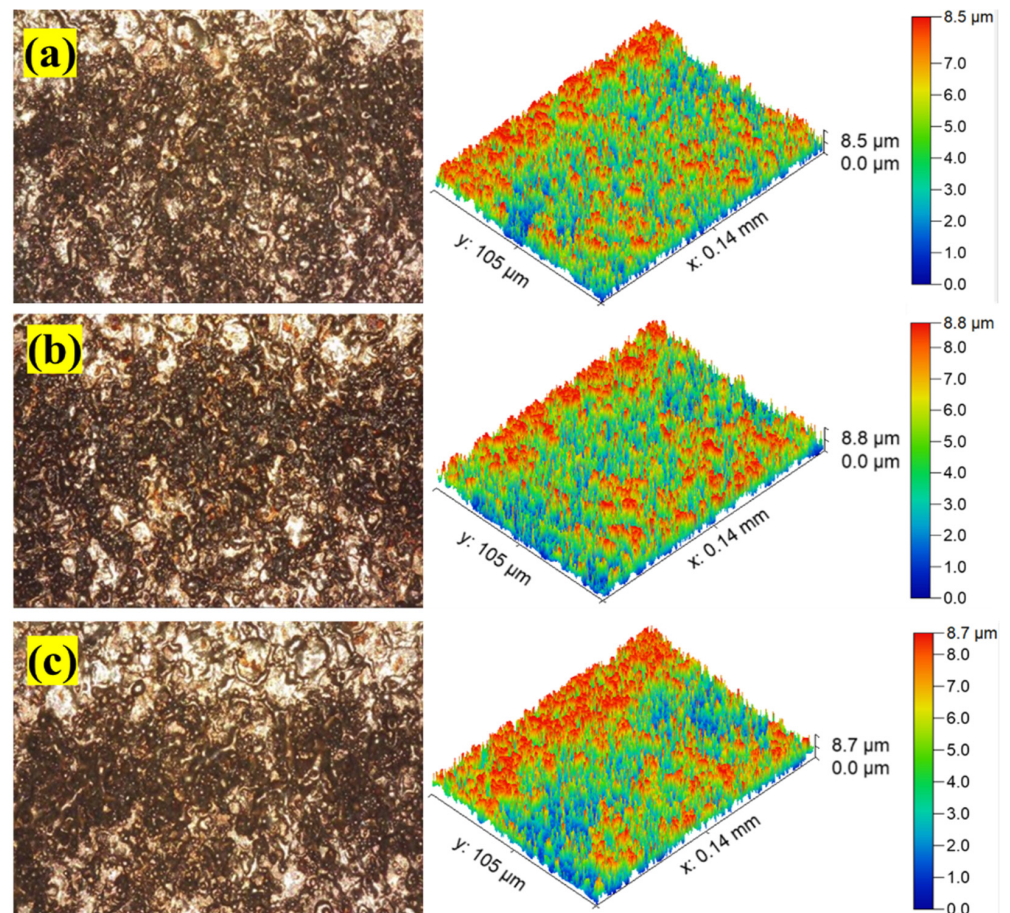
Surface roughness using different electrode design parameters on different workpiece thicknesses: (a) conventional design employed on 4 mm workpiece thickness; C₀-WT₄ ($R_a = 10.13 \mu\text{m}$); (b) circular relief design with 40 degree relief and 2 mm land thickness employed on 4 mm workpiece thickness; CRL₄₀-L₂-WT₄ ($R_a = 8.25 \mu\text{m}$); (c) circular relief design with 40 degree relief and 2 mm land thickness employed on 8 mm workpiece thickness CRL₄₀-L₂-WT₈ ($R_a = 13.00 \mu\text{m}$).
